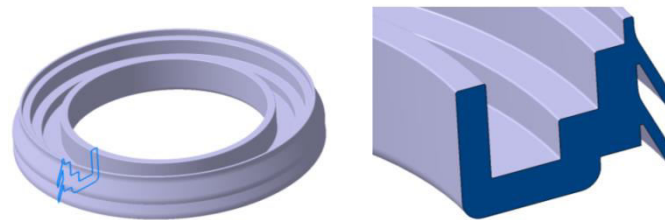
a. 3D CAD SEAL a. Full view, b. Section in detail view
